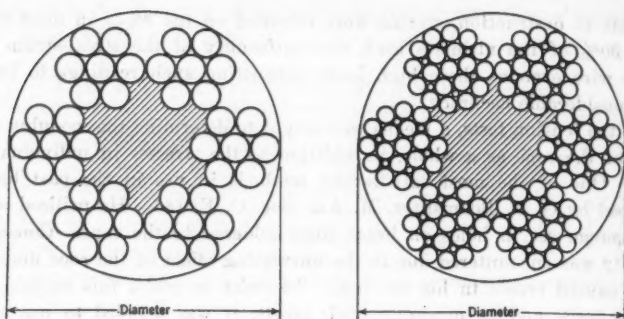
6 x 7 AND 6 x 19 WIRE-ROPE CONSTRUCTION.
